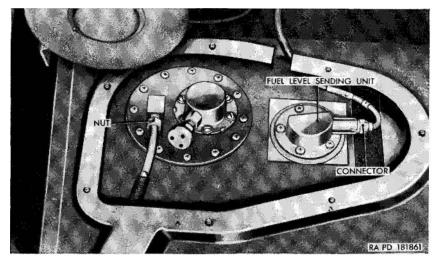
Fuel tank, fuel filter, and fuel level sending unit M170—installed—driver's seat and fuel tank units access plate—removed.
